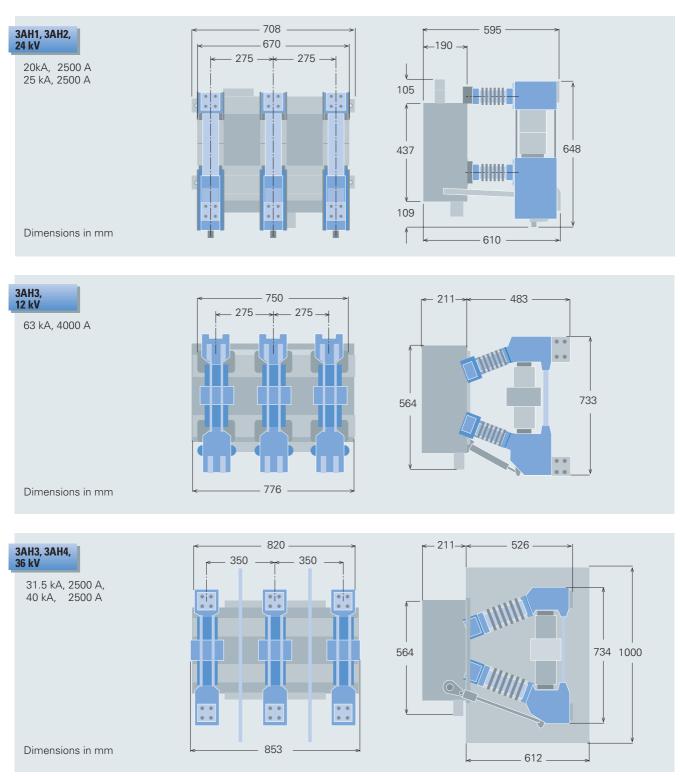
Dimensions of typical vacuum circuit-breakers type 3AH (Examples)
